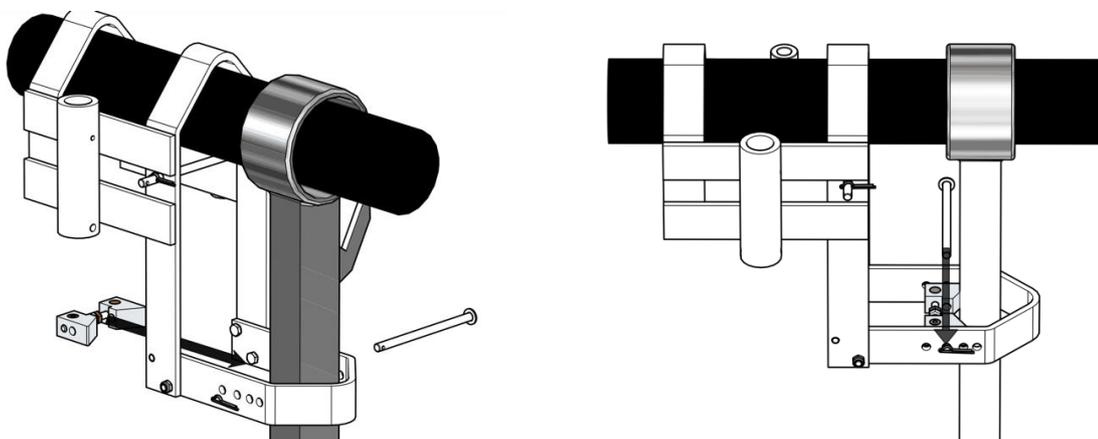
The clamp is held in place by the locking bolt in the lower section of the mounting bracket
